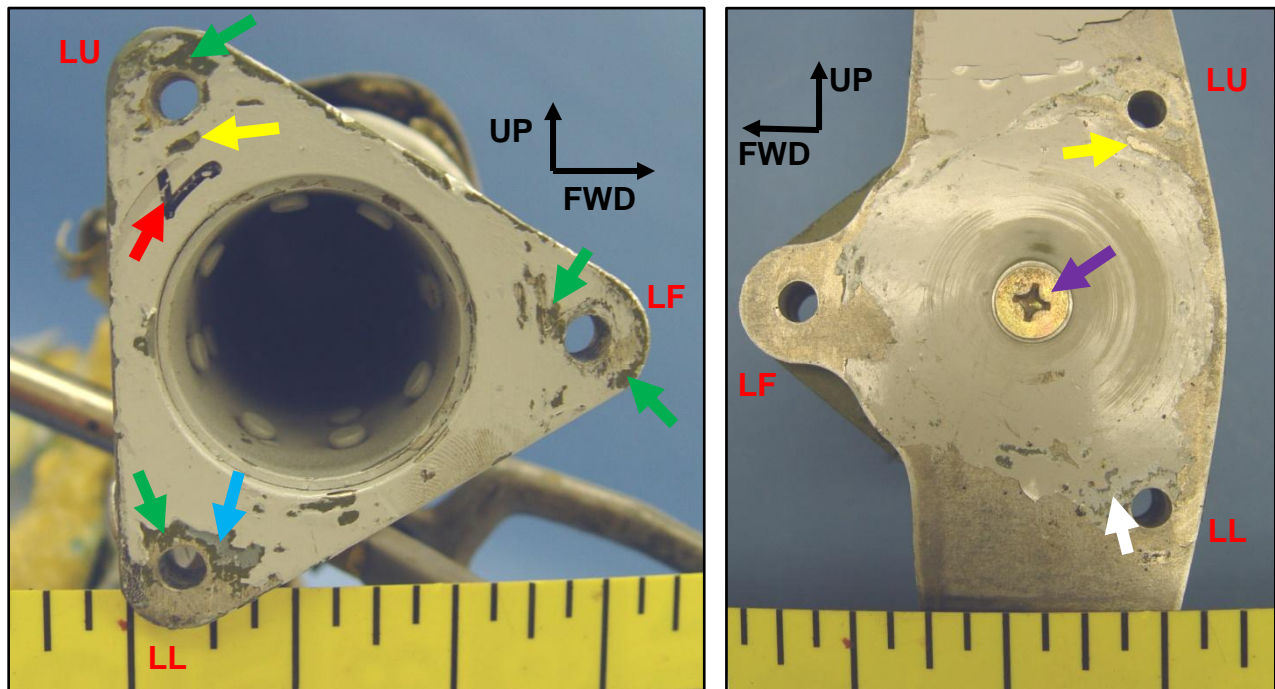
The mounting face of the left fitting (left) and its mating face on the left horn (right).
